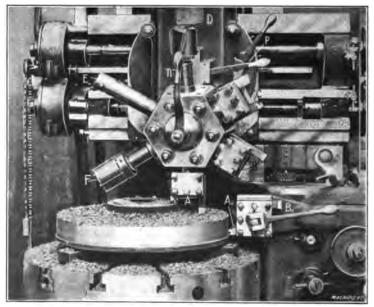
Turning a Gear Blank on a Vertical Turret Lathe
